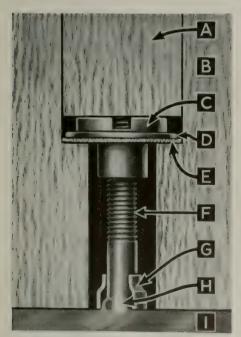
Sectional view showing stud used in the laying of wood decking. (A) wooden plug: (B) wood deck planking; (C) slotted nut; (D) washer; (E) lampwick grommet; (F) stud; (G) ferrule; (H) weld; (I) deck plate.
